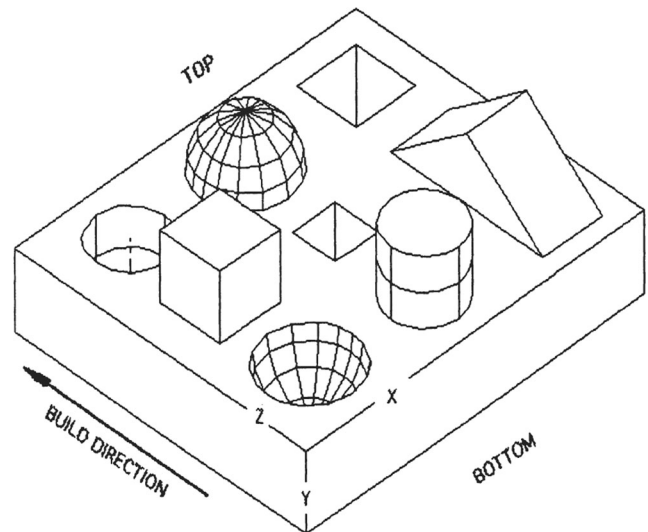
Benchmark artifact proposed by Zhou et al. [25] (overall dimensions = 36.5 mm × 31 mm × 11.9 mm)
